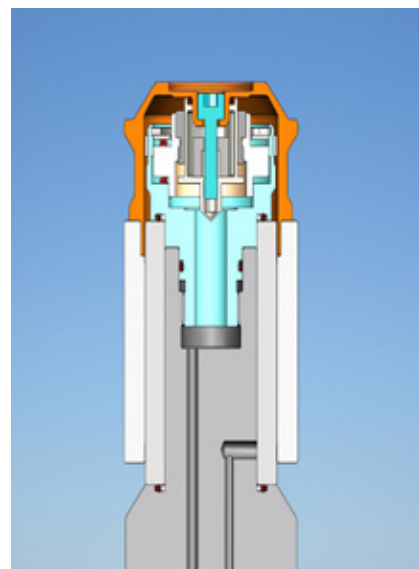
Drawing of piston-cylinder assembly and mounting post.
